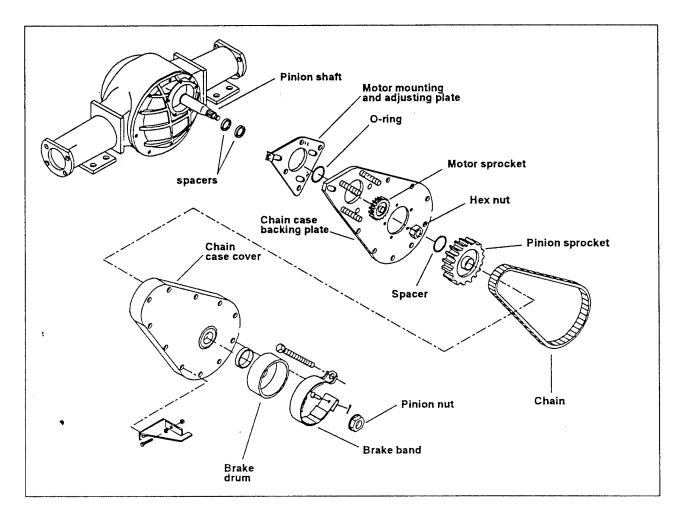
Disassembling and Reassembling the Power Traction Assembly
